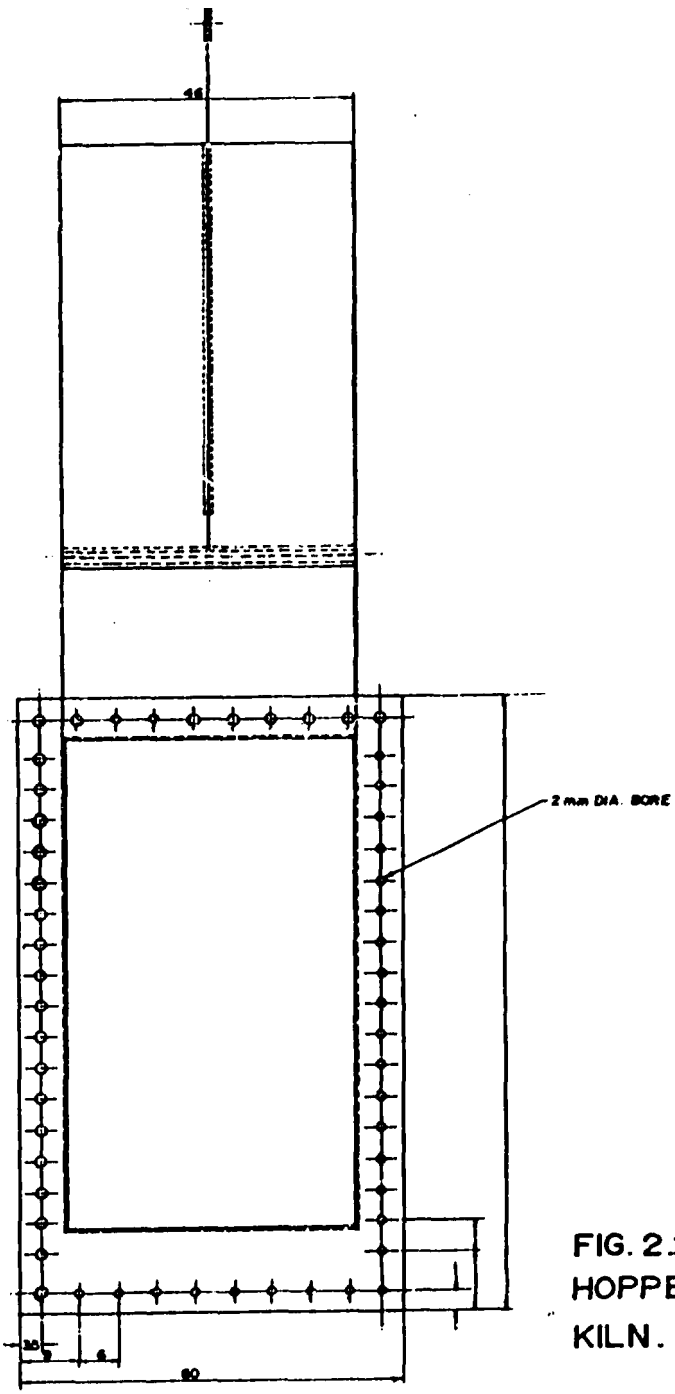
CHARGING HOPPER FOR MOBILE KILN.
